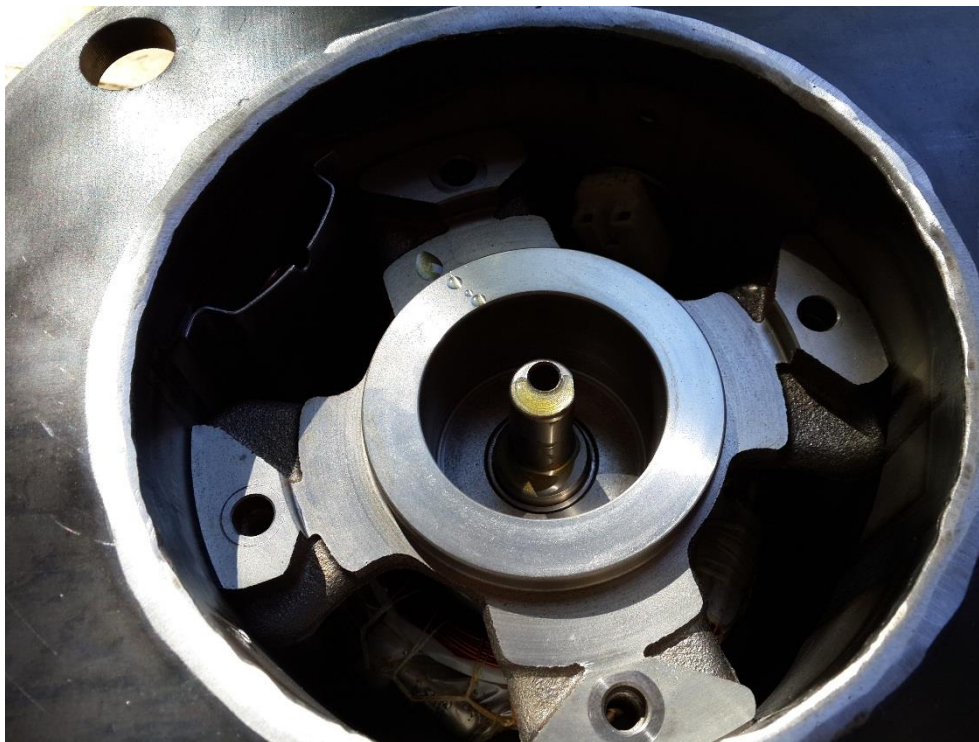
Scroll expander with eccentric shaft and lubrication hole
